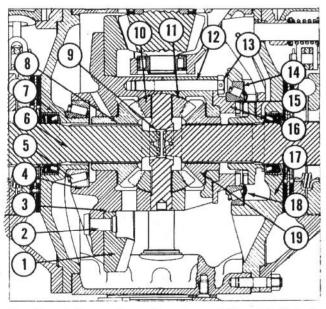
Differential Assembly - Sectional View-W/Diff. Lock
